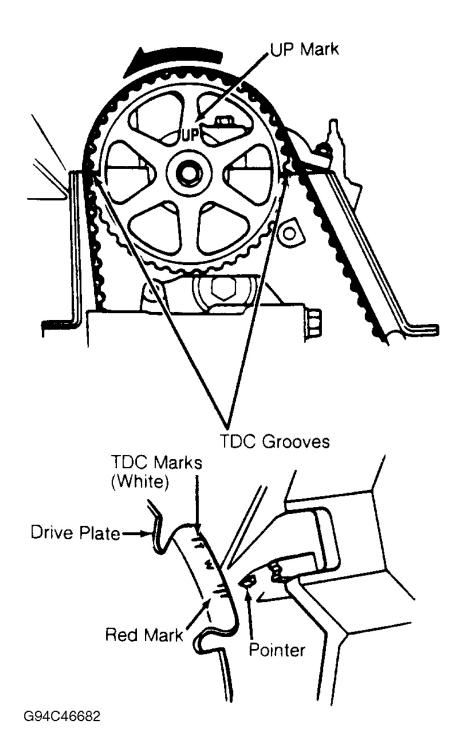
Positioning Camshaft Sprocket for Valve Adjustment (2.2L SOHC - Prelude) Courtesy of AMERICAN HONDA MOTOR CO., INC.
